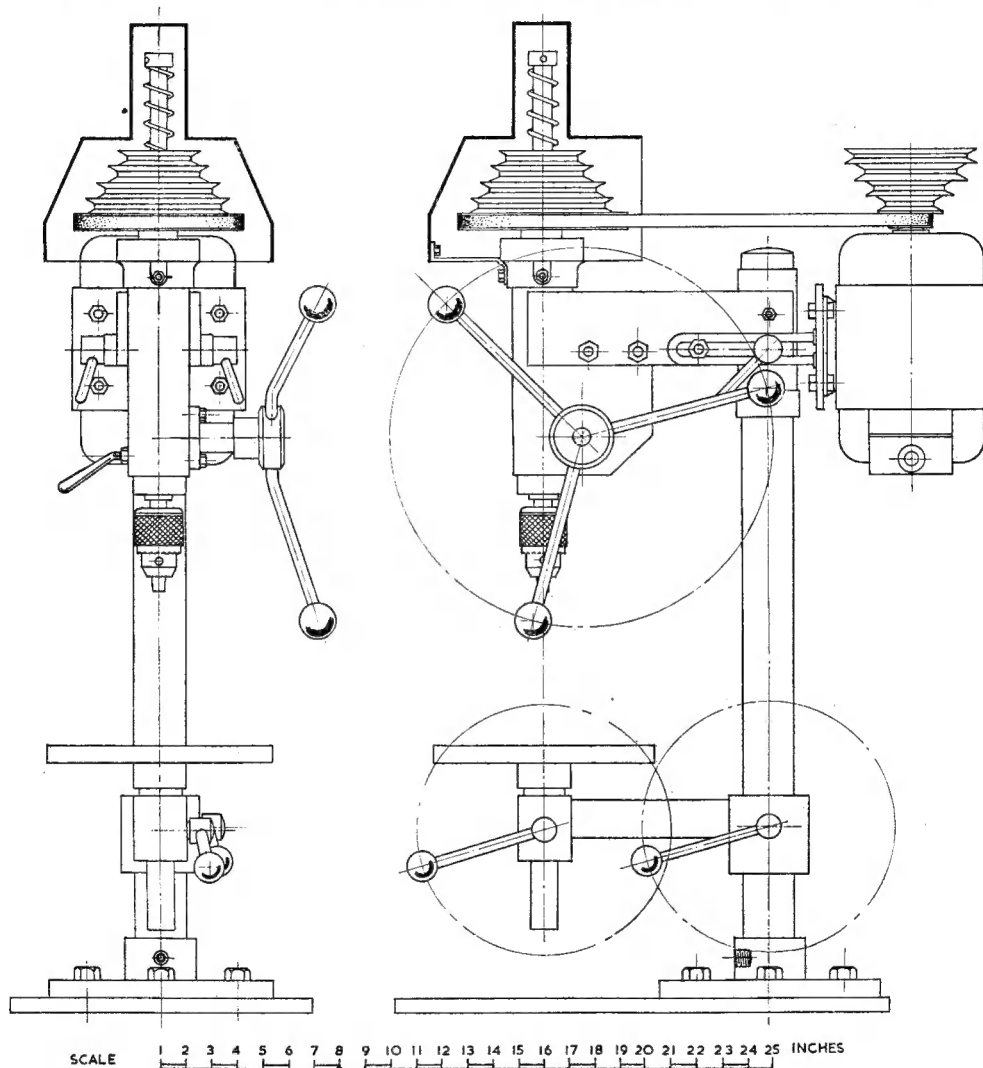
General arrangement of the 0- $\frac{1}{2}$ in. drilling machine
